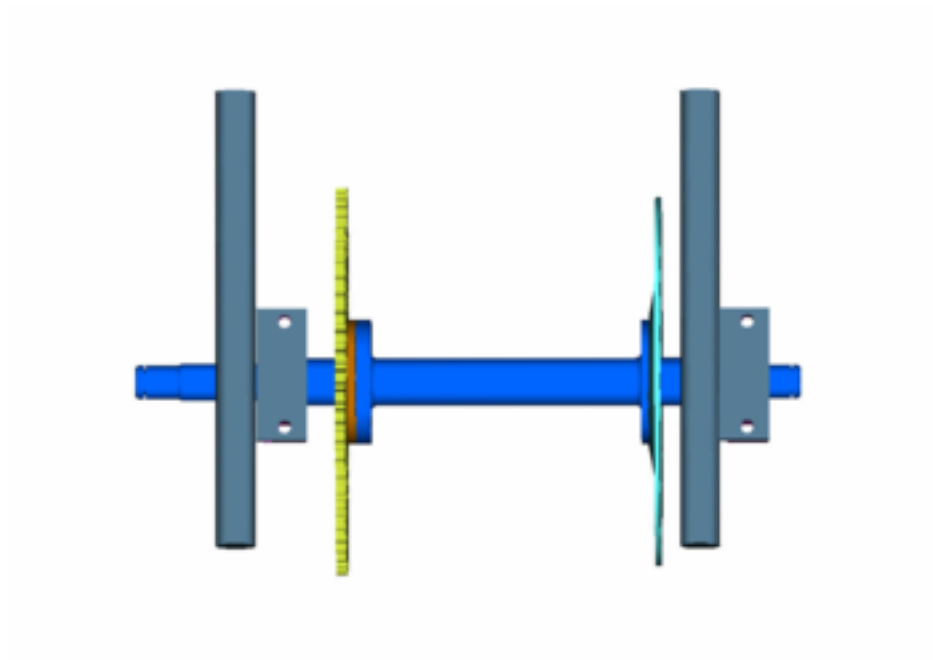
Top view showing the proposed mounting position of the centre shaft assembly in the SAE car.
